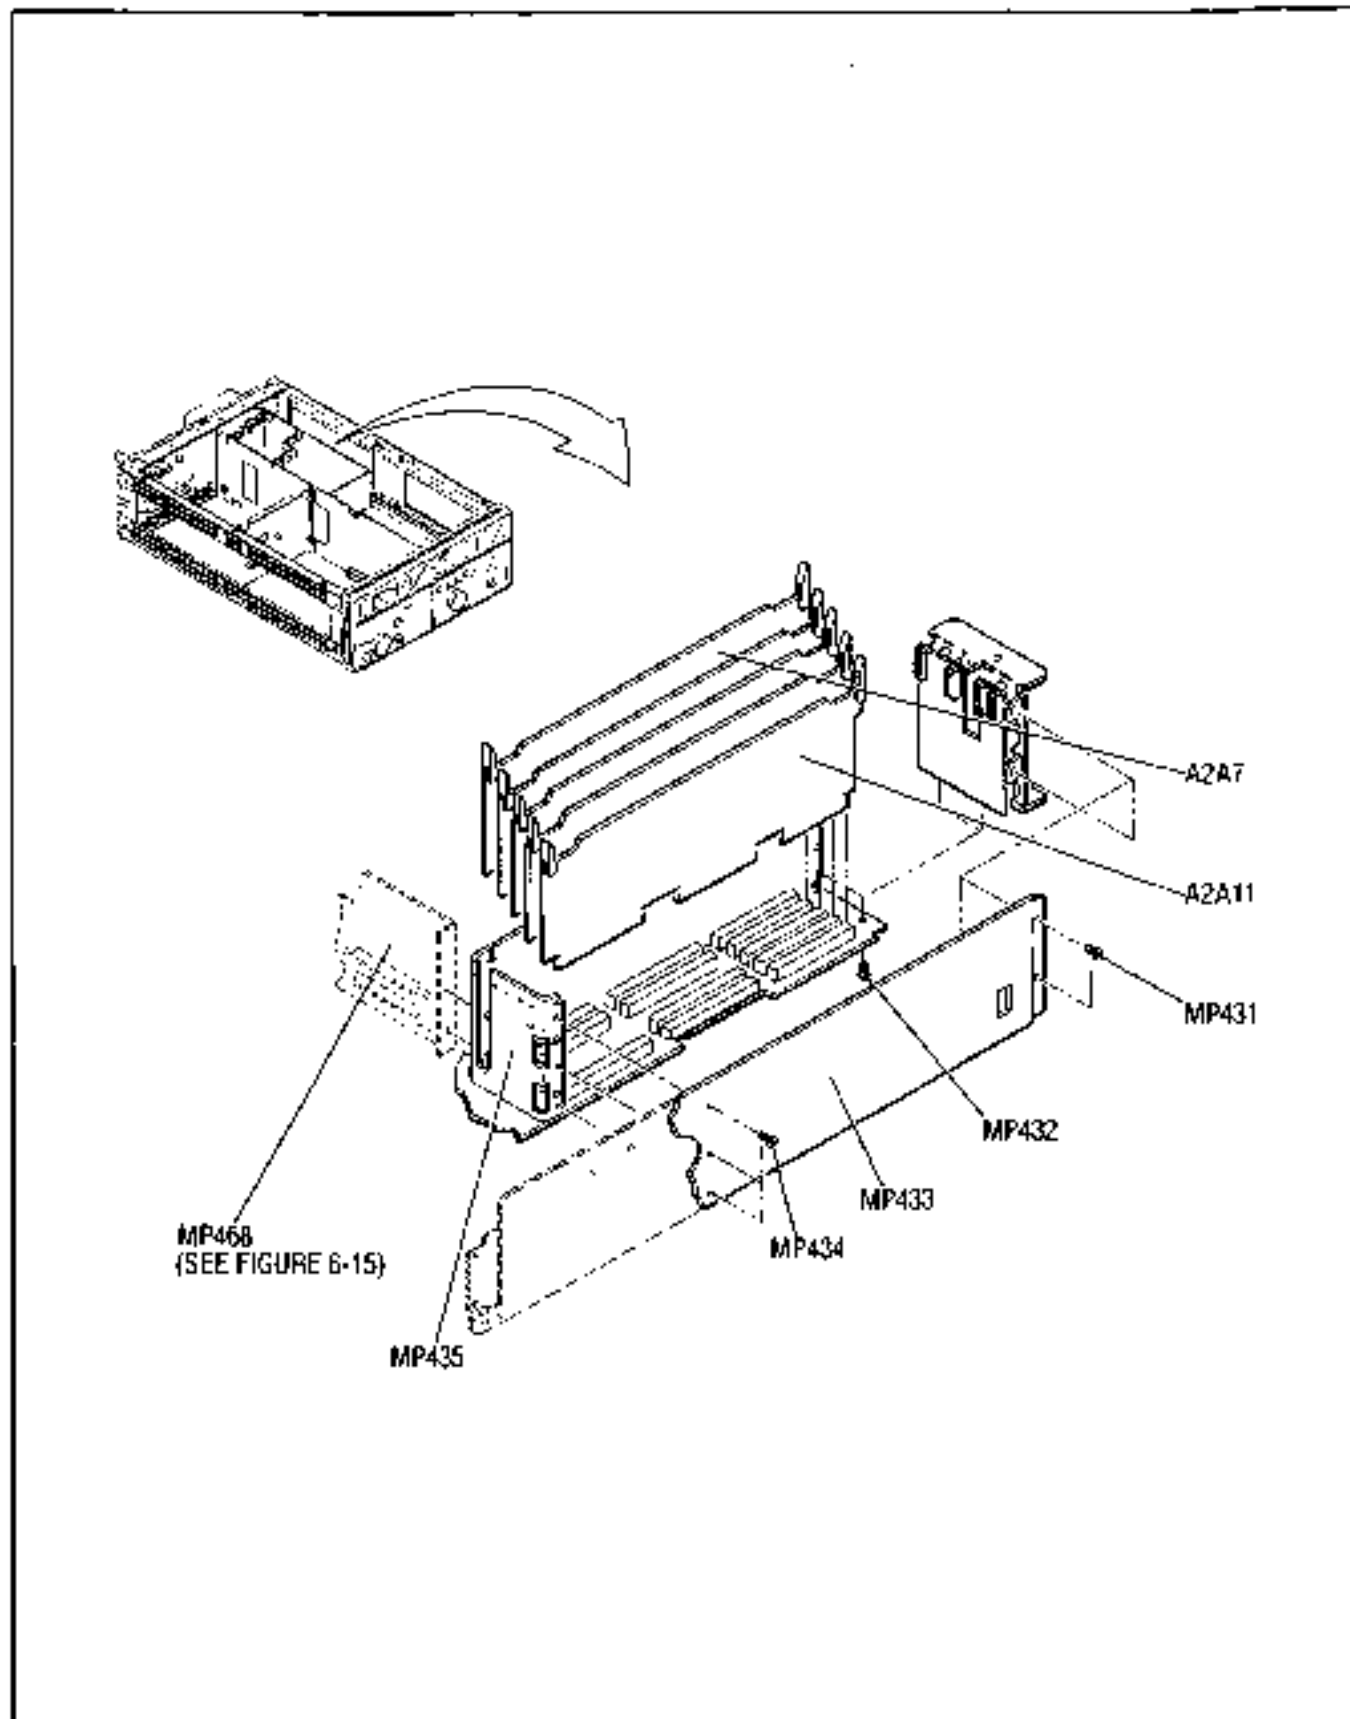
P/O A2 Controller Assembly and Rear Panel Illustrated Parts Breakdown
